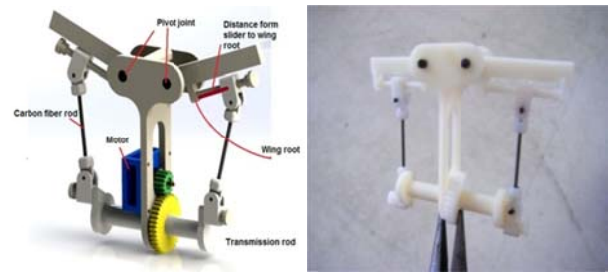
The second generation of mechanism design for the flapping-wing robot. (a) CAD model (b) Fabricated prototype
